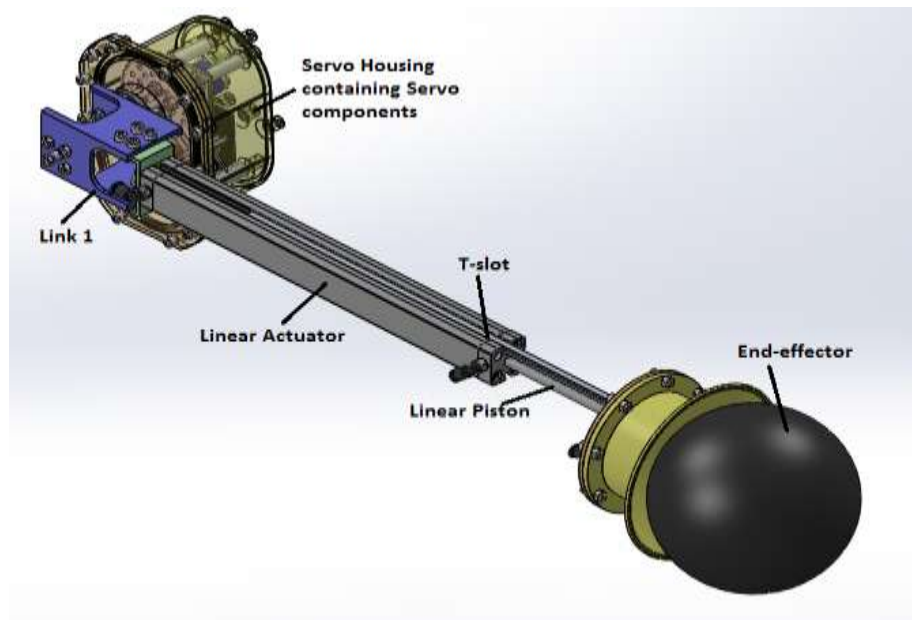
CAD model of Manipulator Design 3 in a Forward Retracted Position
